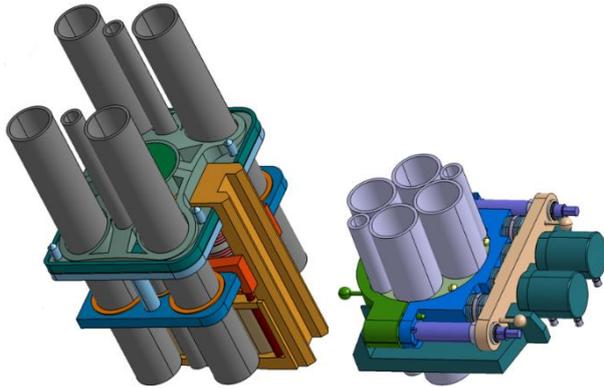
Mechanical Pipe Connector designs: concept design 1 (left), concept design 2 (right).
